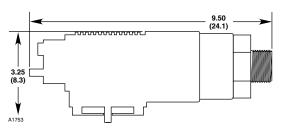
Stainless Steel PointWatch Unit Dimensions in Inches (cm)
